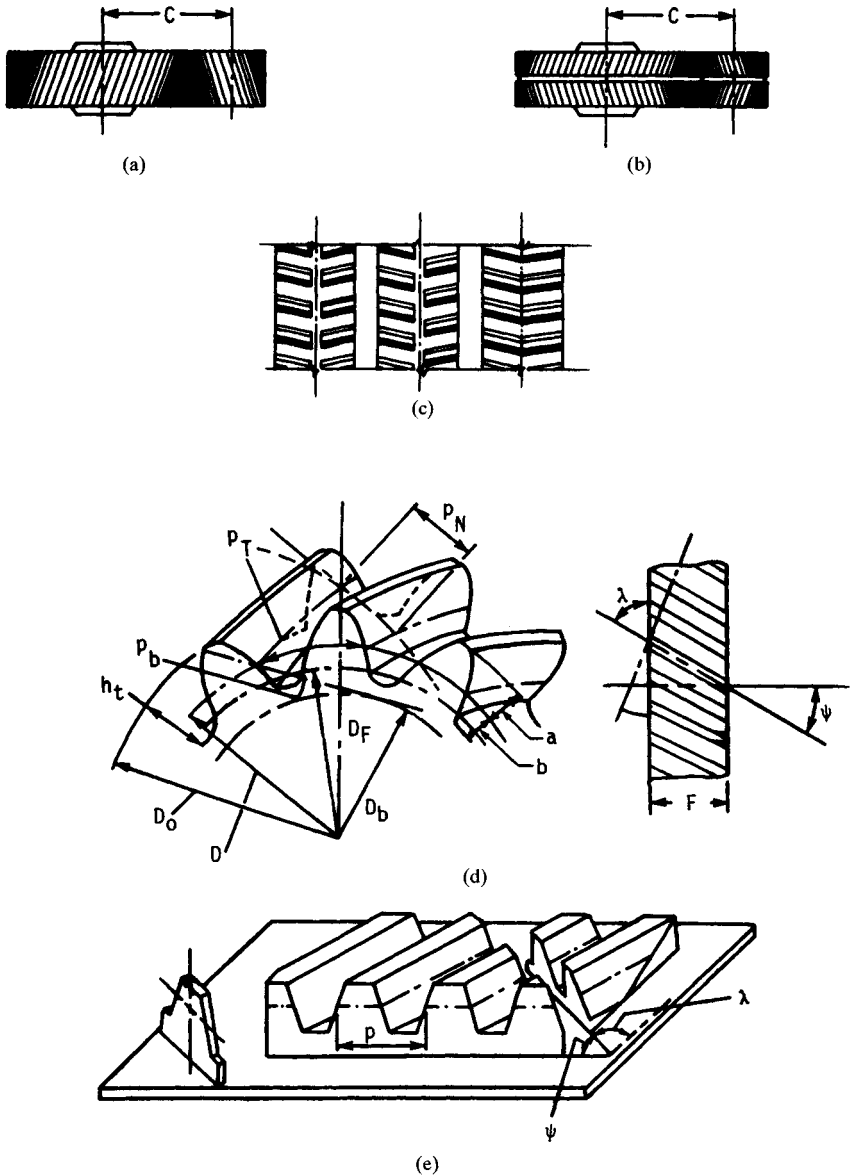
Terminology of helical gearing. (a) Single-helix gear. (b) Double-helix gear. (c) Types of double-helix gears: left, conventional; center, staggered; right, continuous or herringbone. (d) Geometry. (e) Helical rack.
